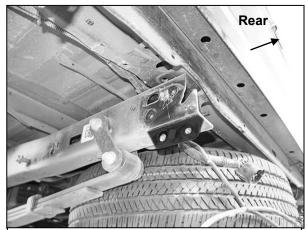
Models without receiver hitch, remove hardware attaching bumper and brackets to side of frame to remove complete bumper assembly (passenger/right side pictured)
